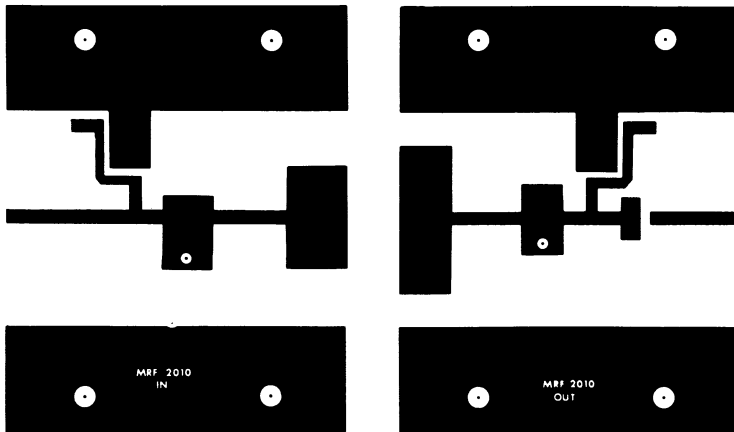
PRINTED CIRCUIT BOARD LAYOUT - 2 GHz TEST CIRCUIT
